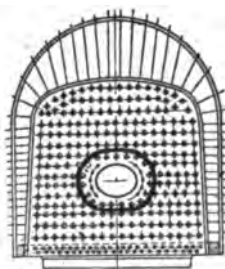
PATCH WELDED ON DOOR COLLAR.
